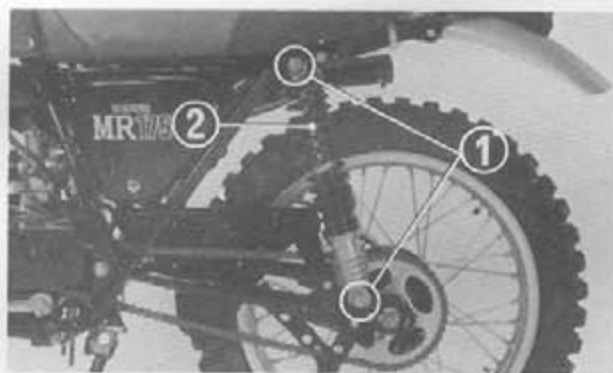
(1) 10 mm bolts (2) Rear shock absorber
